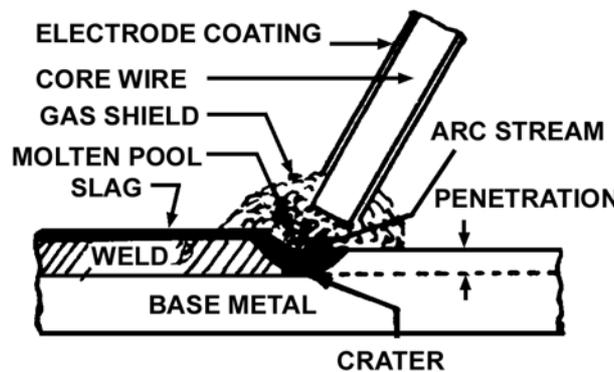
, Schematic diagram of shielded metal-arc welding.
